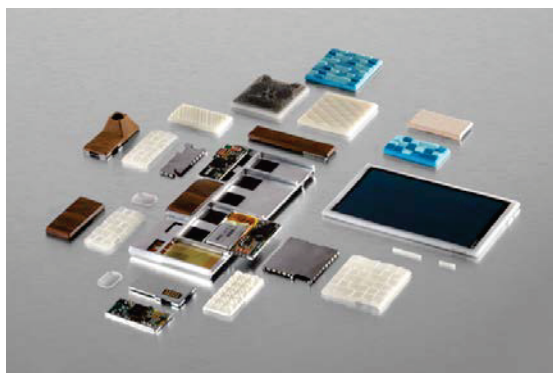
Parts of a functional prototype of a Project Ara phone including the endoskeleton frame, the screen, electrical components and custom 3D-printed module enclosures
